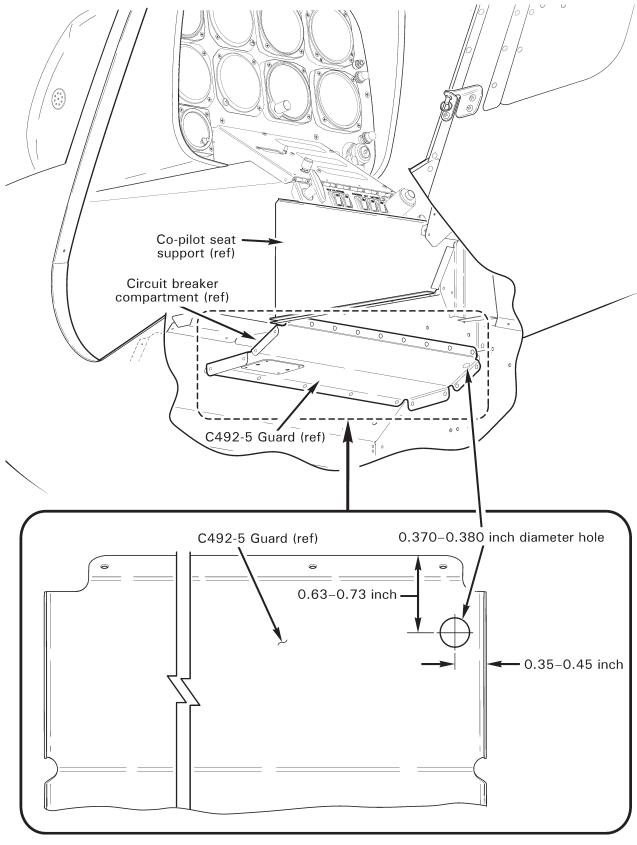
C492-5 Guard drill location (view looking inboard, under circuit breaker)
